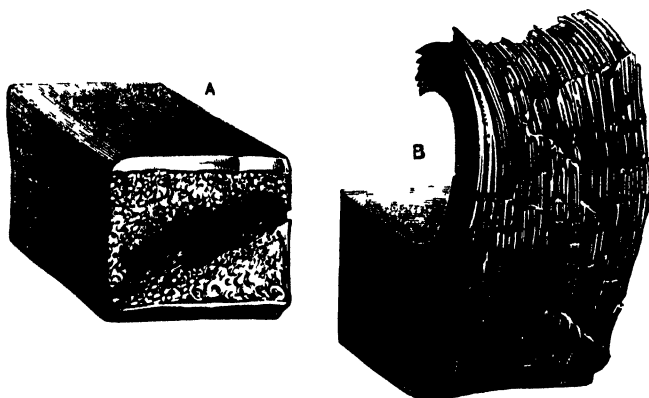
A. Granular fracture of iron. B. Fibrous fracture of iron.
